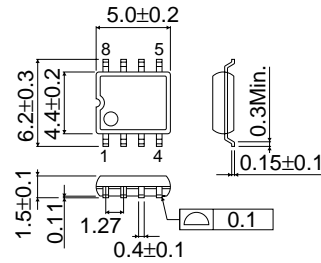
(b) PHYSICAL DIMENSION (Units : mm)
